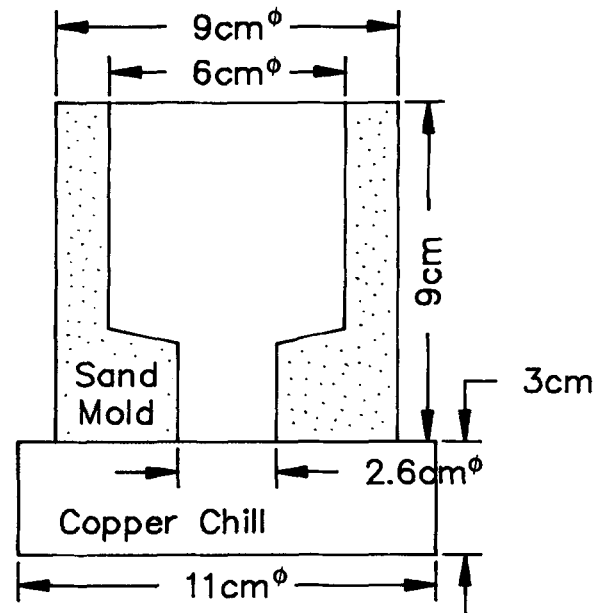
Dimensioning of casting as a standard for the porosity measurement.
